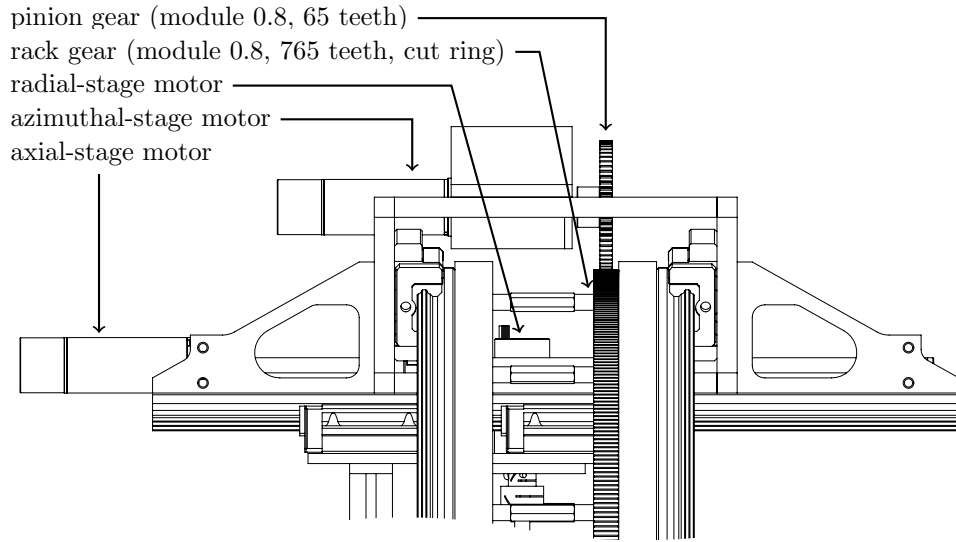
Close-up view of the carriage and ring assembly and gear orientation.
